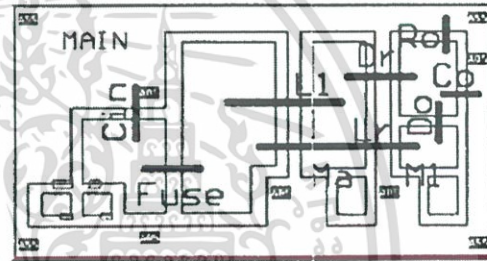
PWB Layout of the power part of the experimental active snubber boost converter
